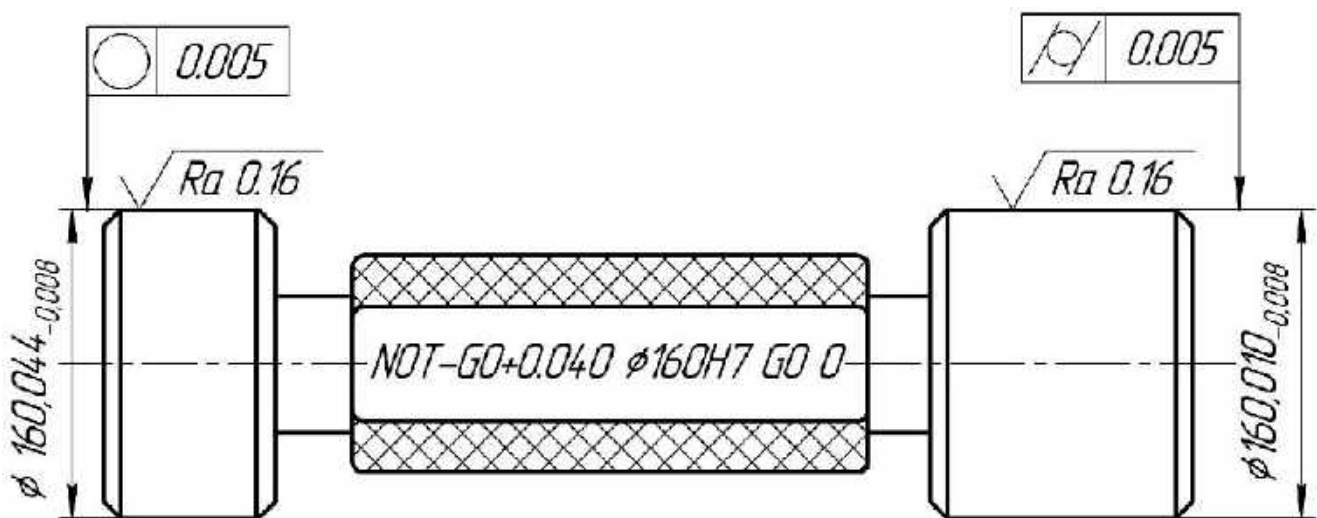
Example of sketch for double-end double-limit plug gauge for check of hole part $\varnothing 160H7$
